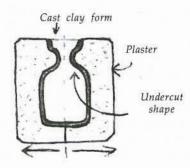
Two-piece Mould opens sideways, to withdraw cast.
